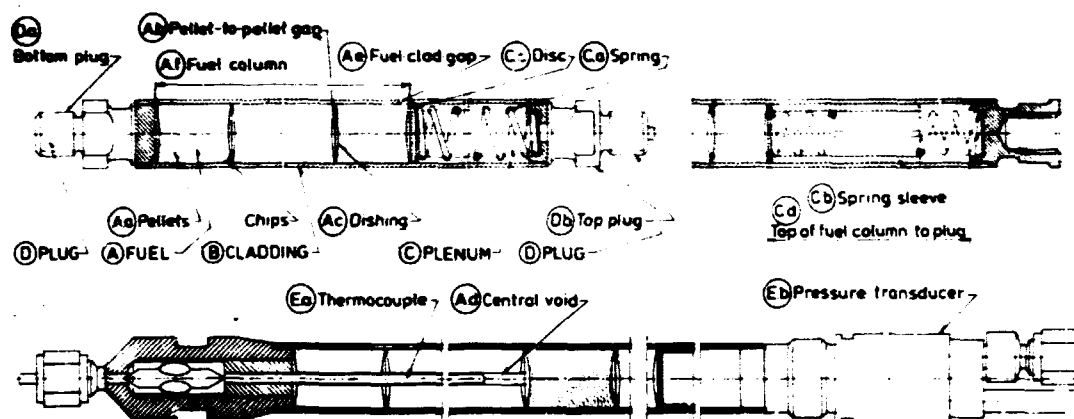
Standard fuel rod (top left), special design of hold-down spring device (top right) and test fuel rod with central thermocouple and fission gas pressure transducer (bottom).
